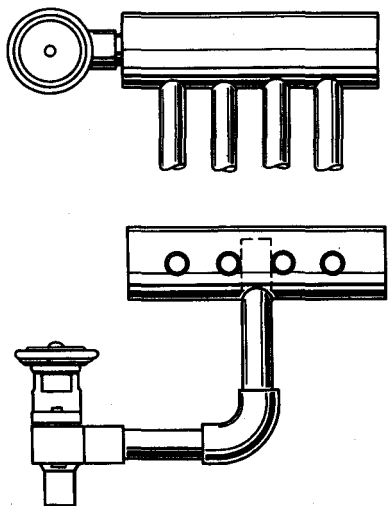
Single outlet thermostatic expansion valve and manifold-type distributor. (Courtesy Alco Valve Company.)
